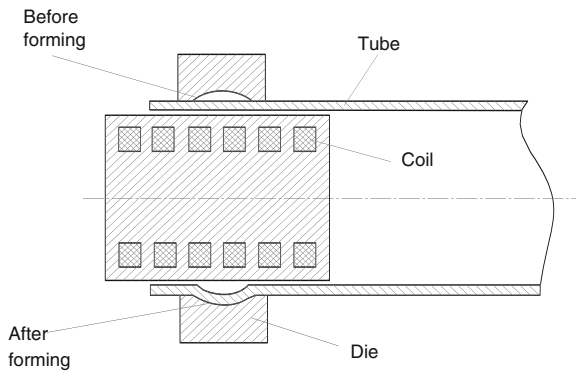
Expansion of tube-shaped components (acc. to Puls Plasmatechnik)
